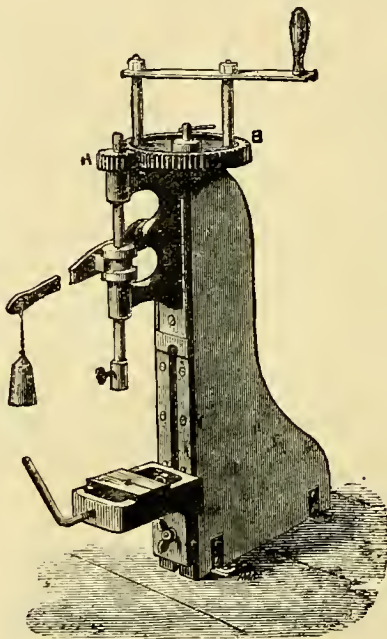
PARKER'S HAND-DRILLING MACHINE.
